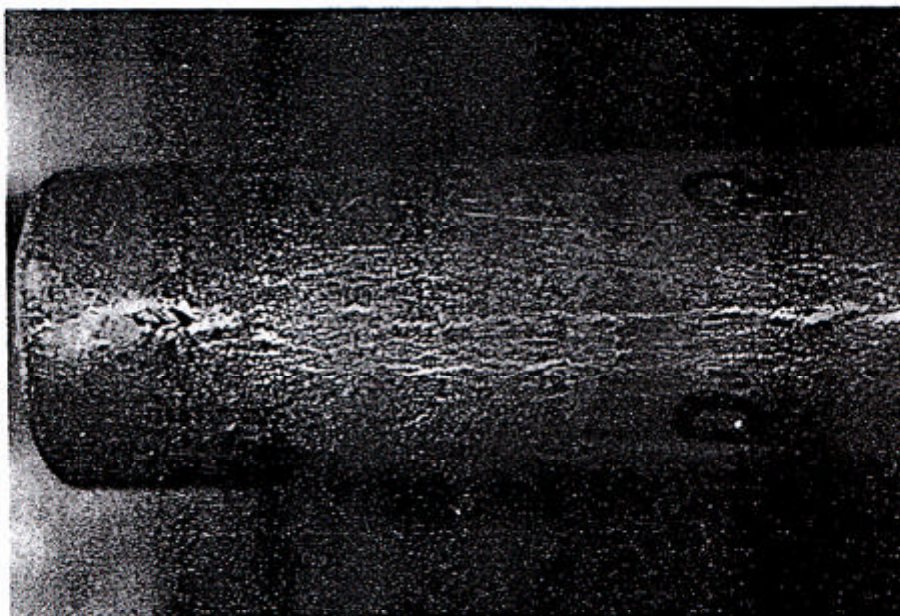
RESISTANCE WELDED - 4.55 MM
